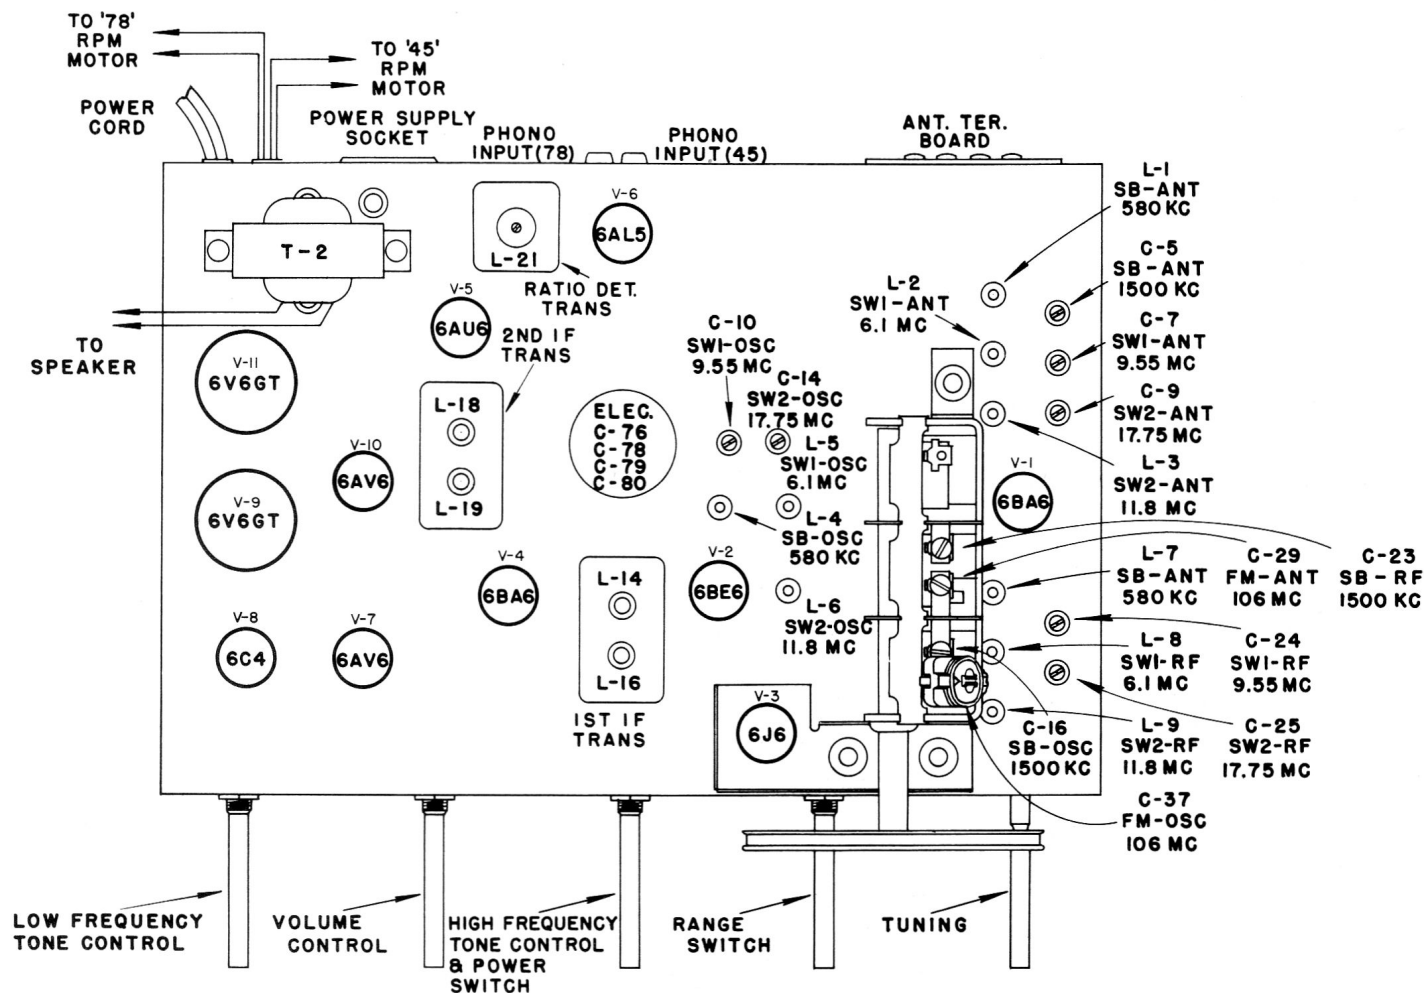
CHASSIS LAYOUT & ALIGNMENT ADJUSTMENTS
